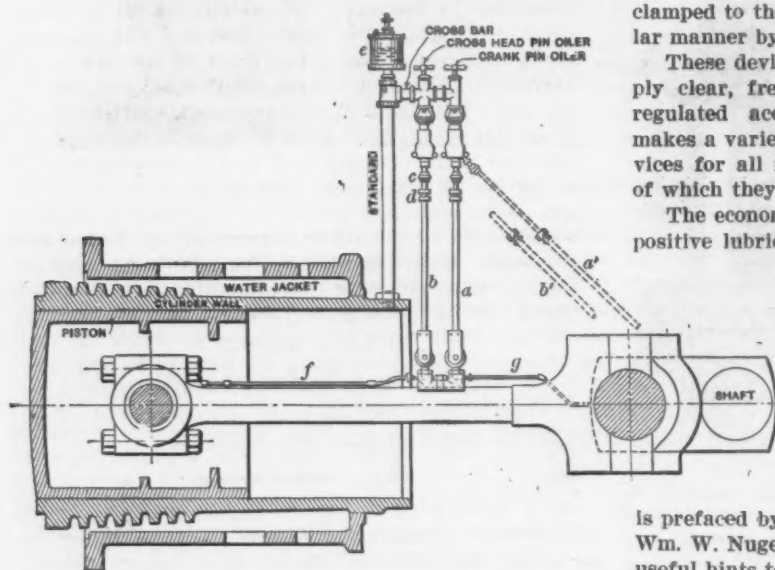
Nugent Oiling Device for a Horizontal Gas Engine.
